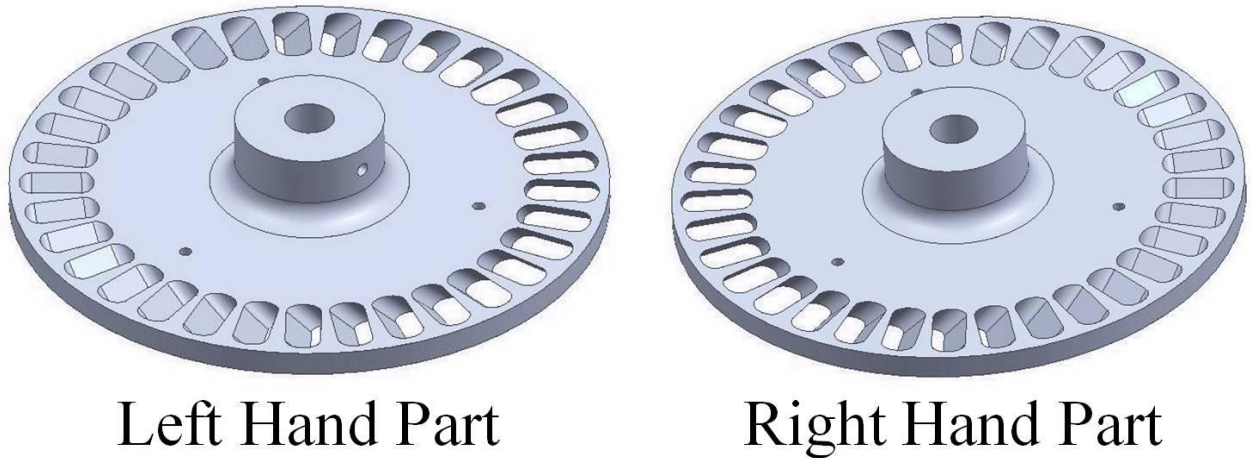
CAD Isometric View of Left Hand & Right Hand Parts
